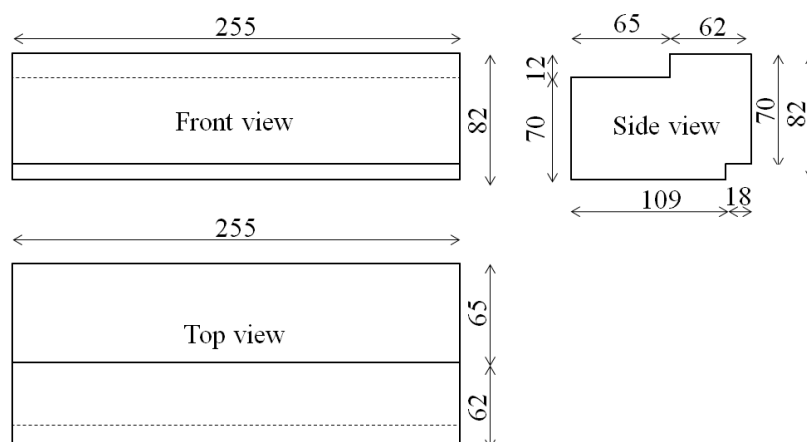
Final workpiece material dimensions of the titanium sample blocks to be used in the primary machining experiments
